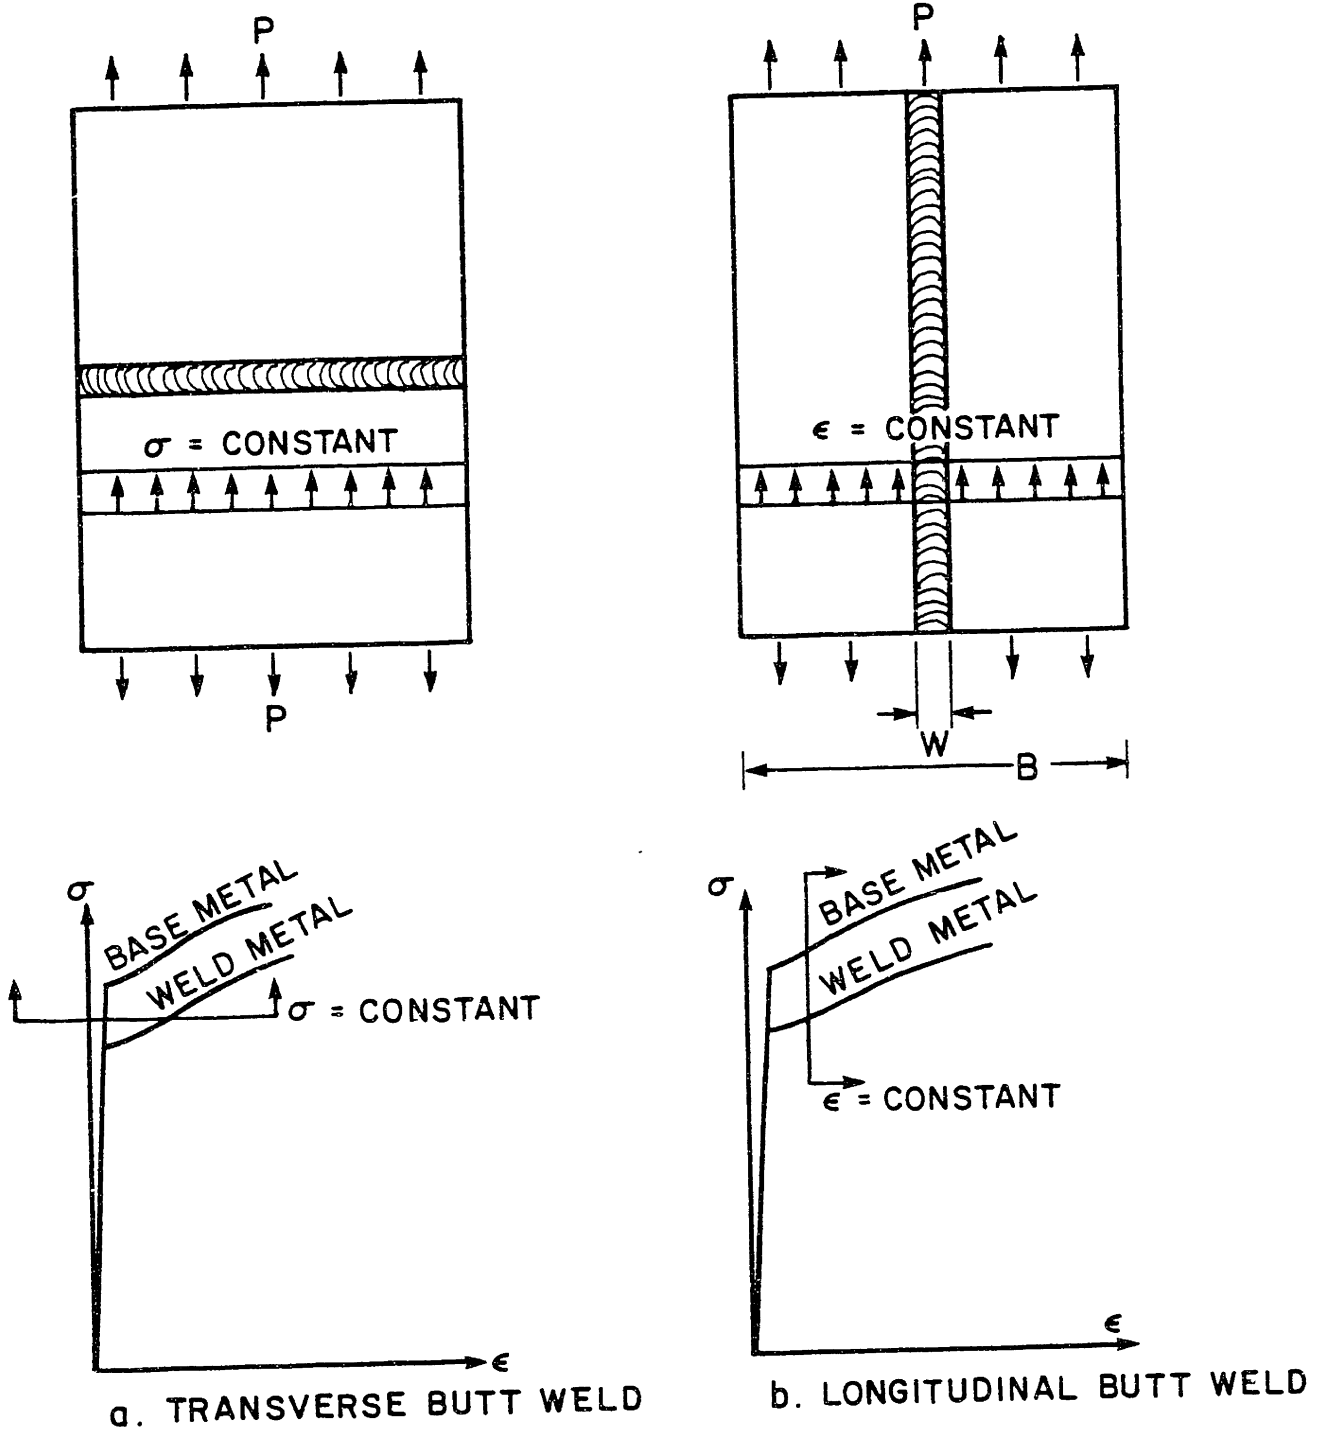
Butt welds subjected to tensile loading,
